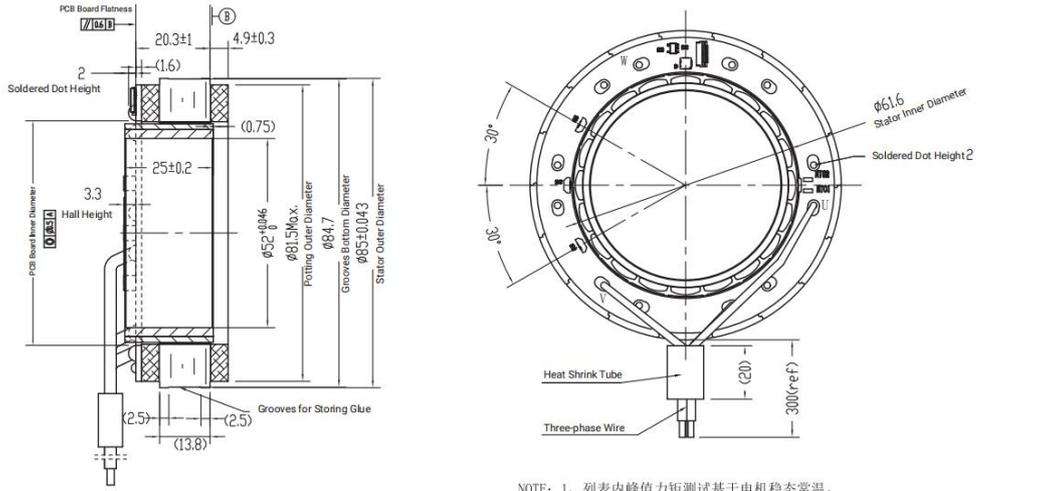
RMD-FL-85-13-400 appearance dimension drawing
